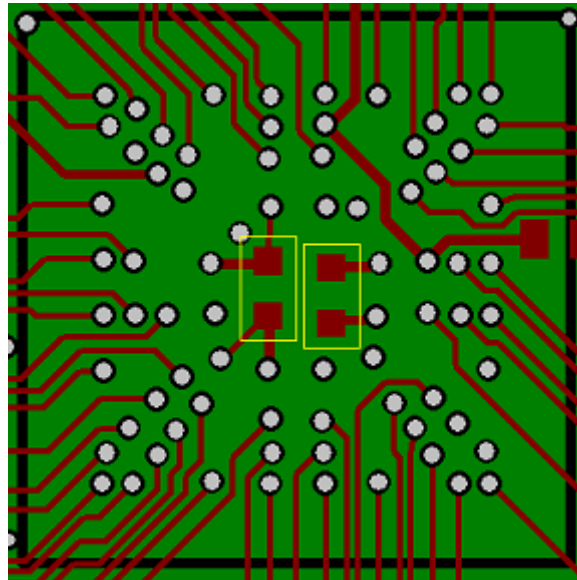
Bottom Layer 212-Ball BGA Escape Routing
